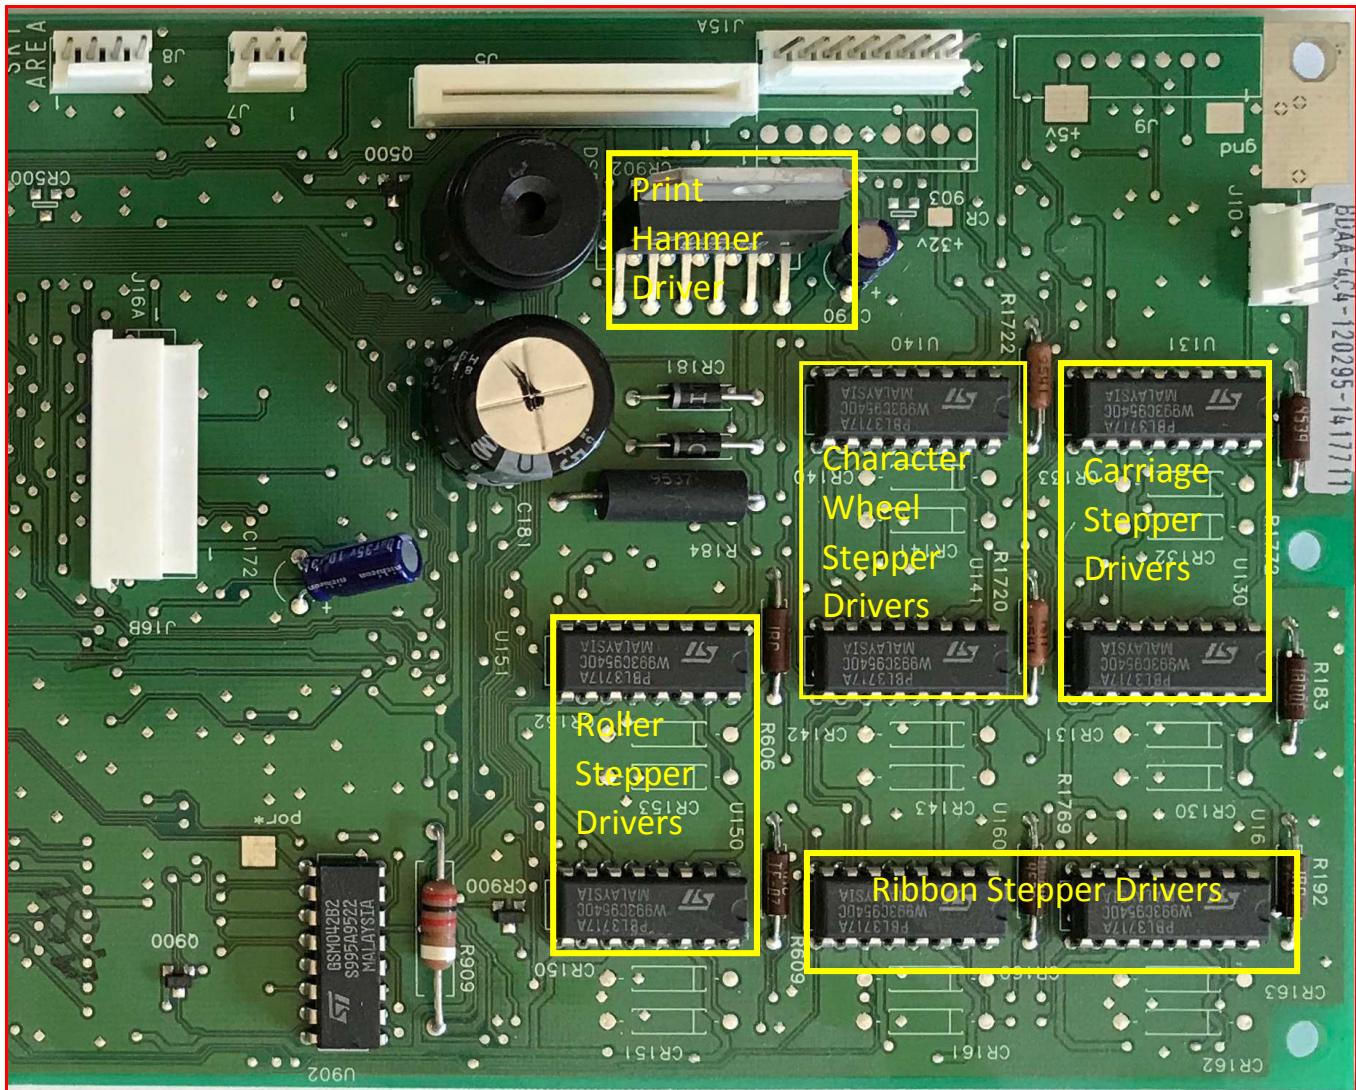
IBM / Lexmark Logic Board Stepper Motor and Solenoid Driver IC Locations.
